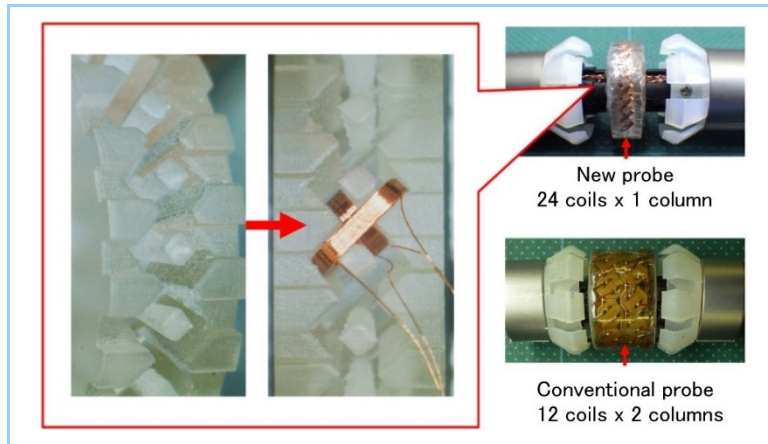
Head of new probe assembled by inserting cross coils into the grooves of coil holder and head of conventional probe
